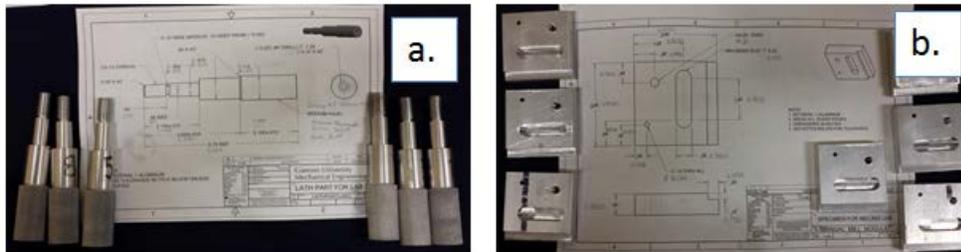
Lab 3 and 6, Fundamentals of Machining, a) lathe part, b) mill part. Students are required to machine both parts to spec.
